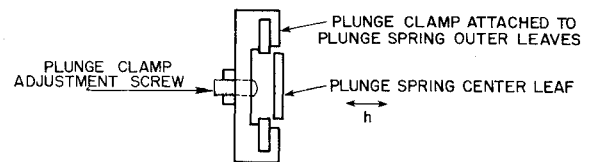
Cross-section view of plunge spring illustrating operation of plunge clamp.
